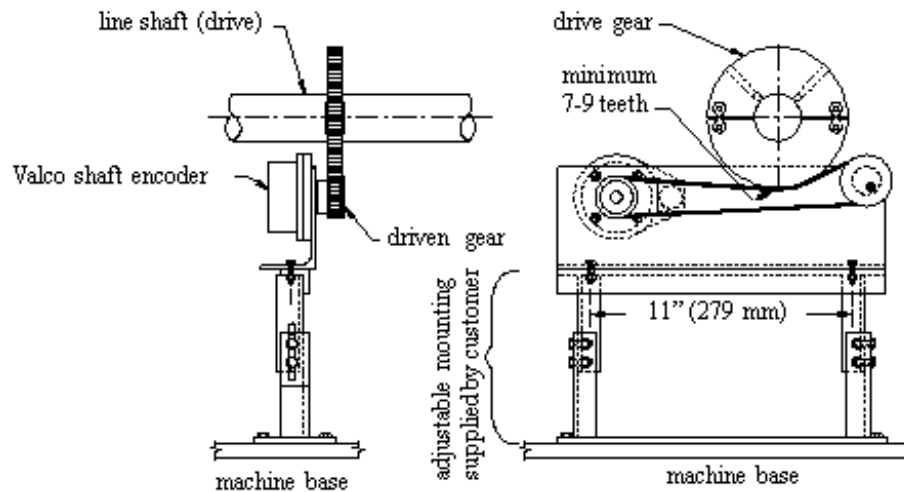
Typical Installation of a Gear-Driven Encoder
